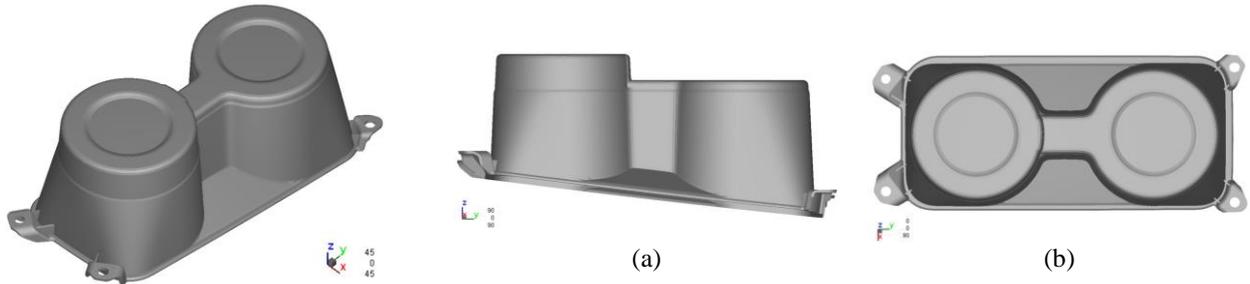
Part geometry (cupholder) (a) Side view (b) Top view
